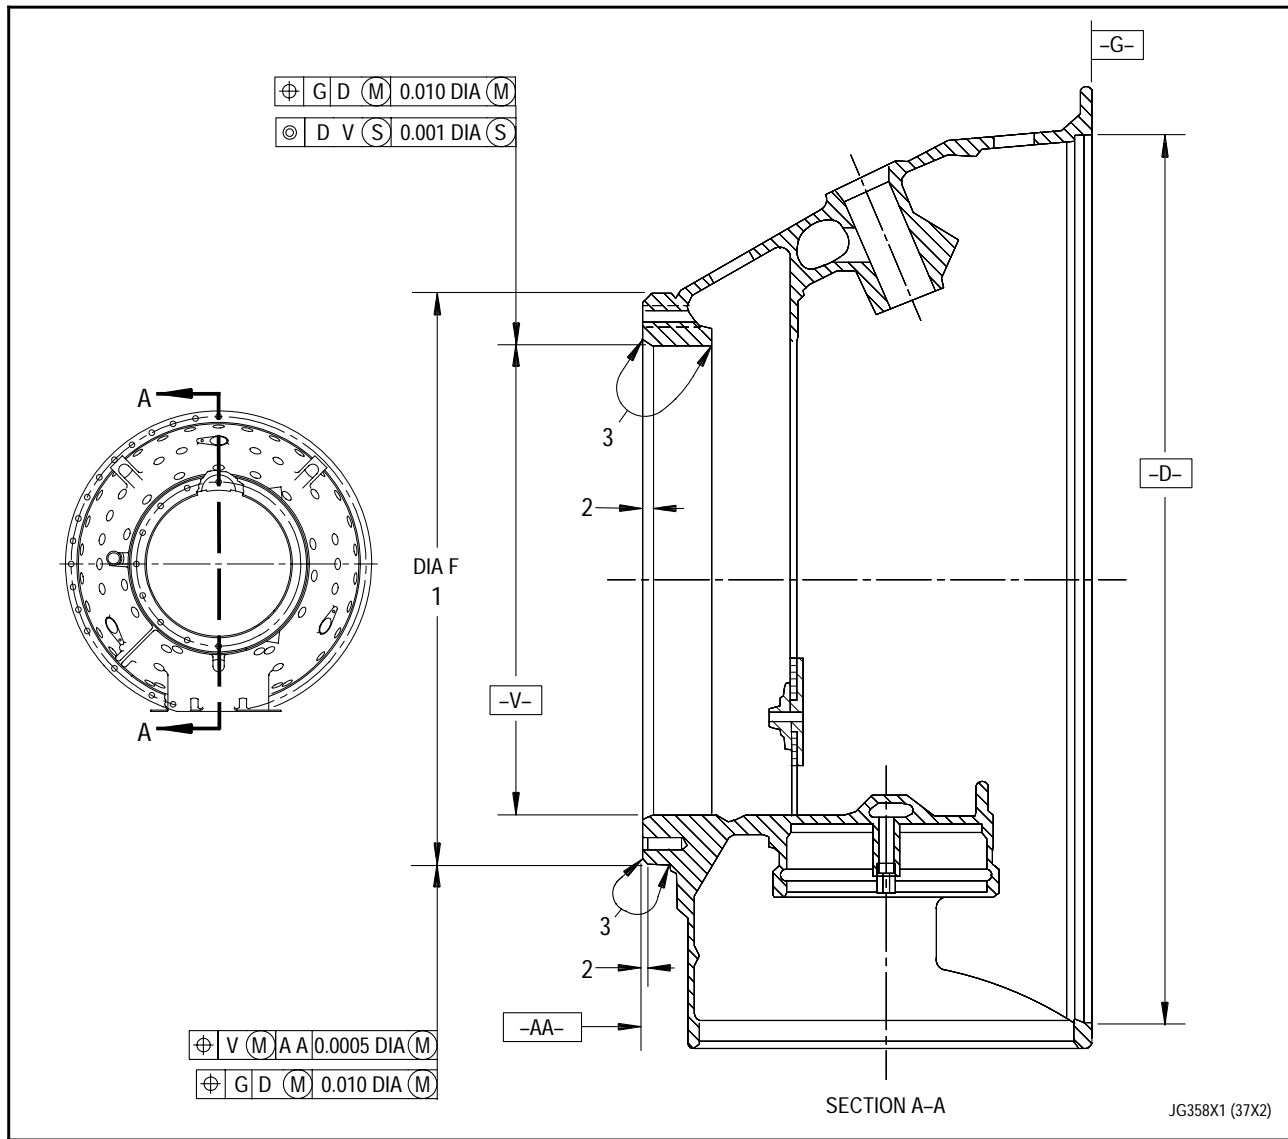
No. 2 Bearing Housing Assembly - Snap Diameter Repair
